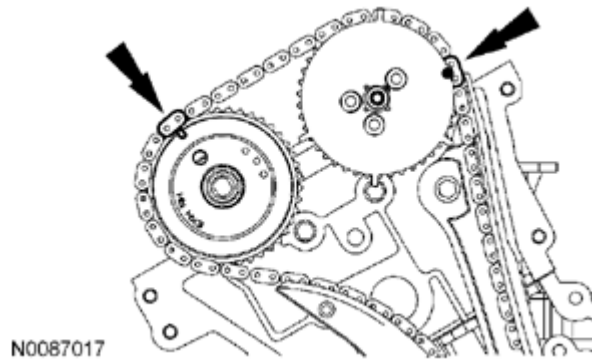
Identifying RH Camshafts Are In Neutral Position
